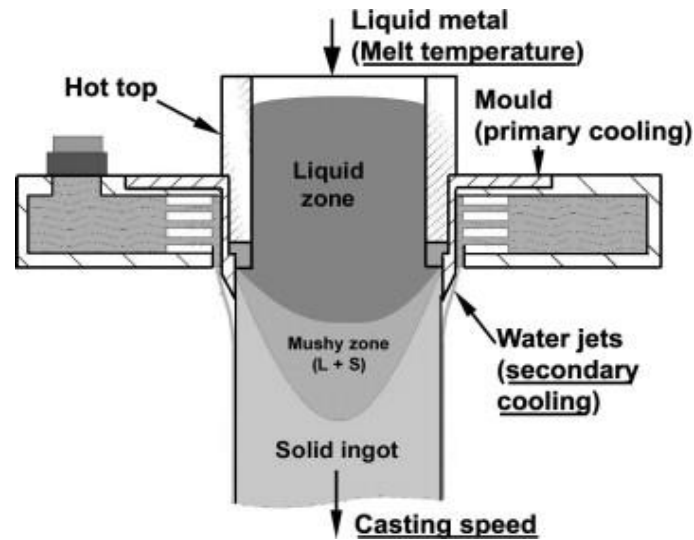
Direct Chill Casting Process(DC Casting) [22].
